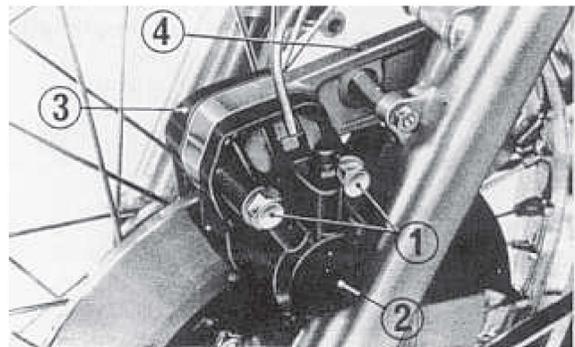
(1) Caliper bolt (3) Caliper B
